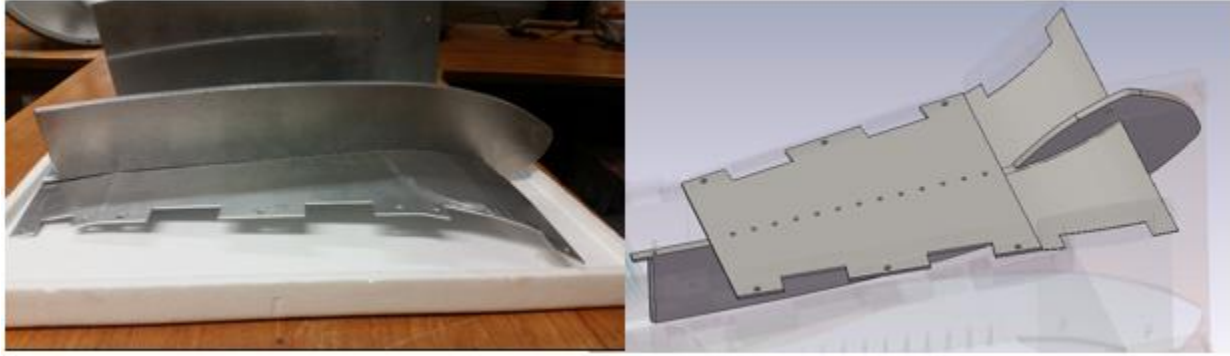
Fabricated conducting walls and Double Ridges of the Horn Antenna
